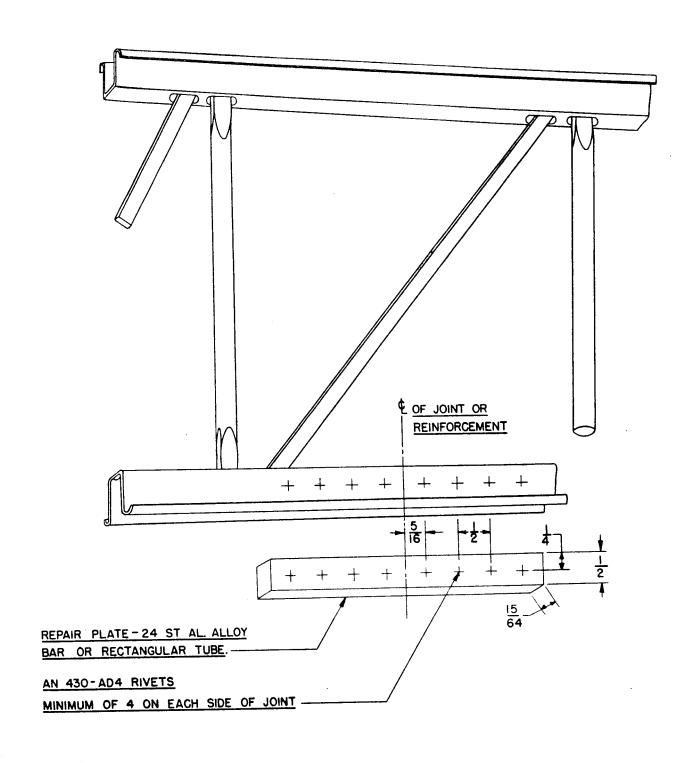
Wing Outer Panel Truss Type Rib Repairs
